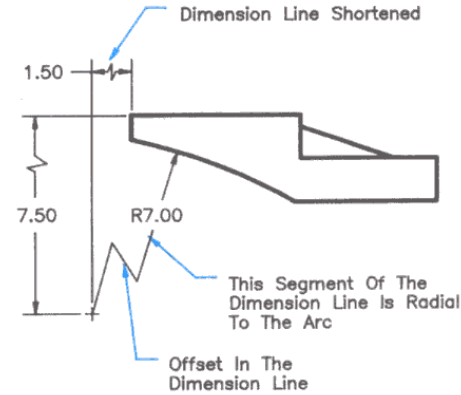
The true dimensions defining arc center location must be shown even when the center point is not shown in its true location.
